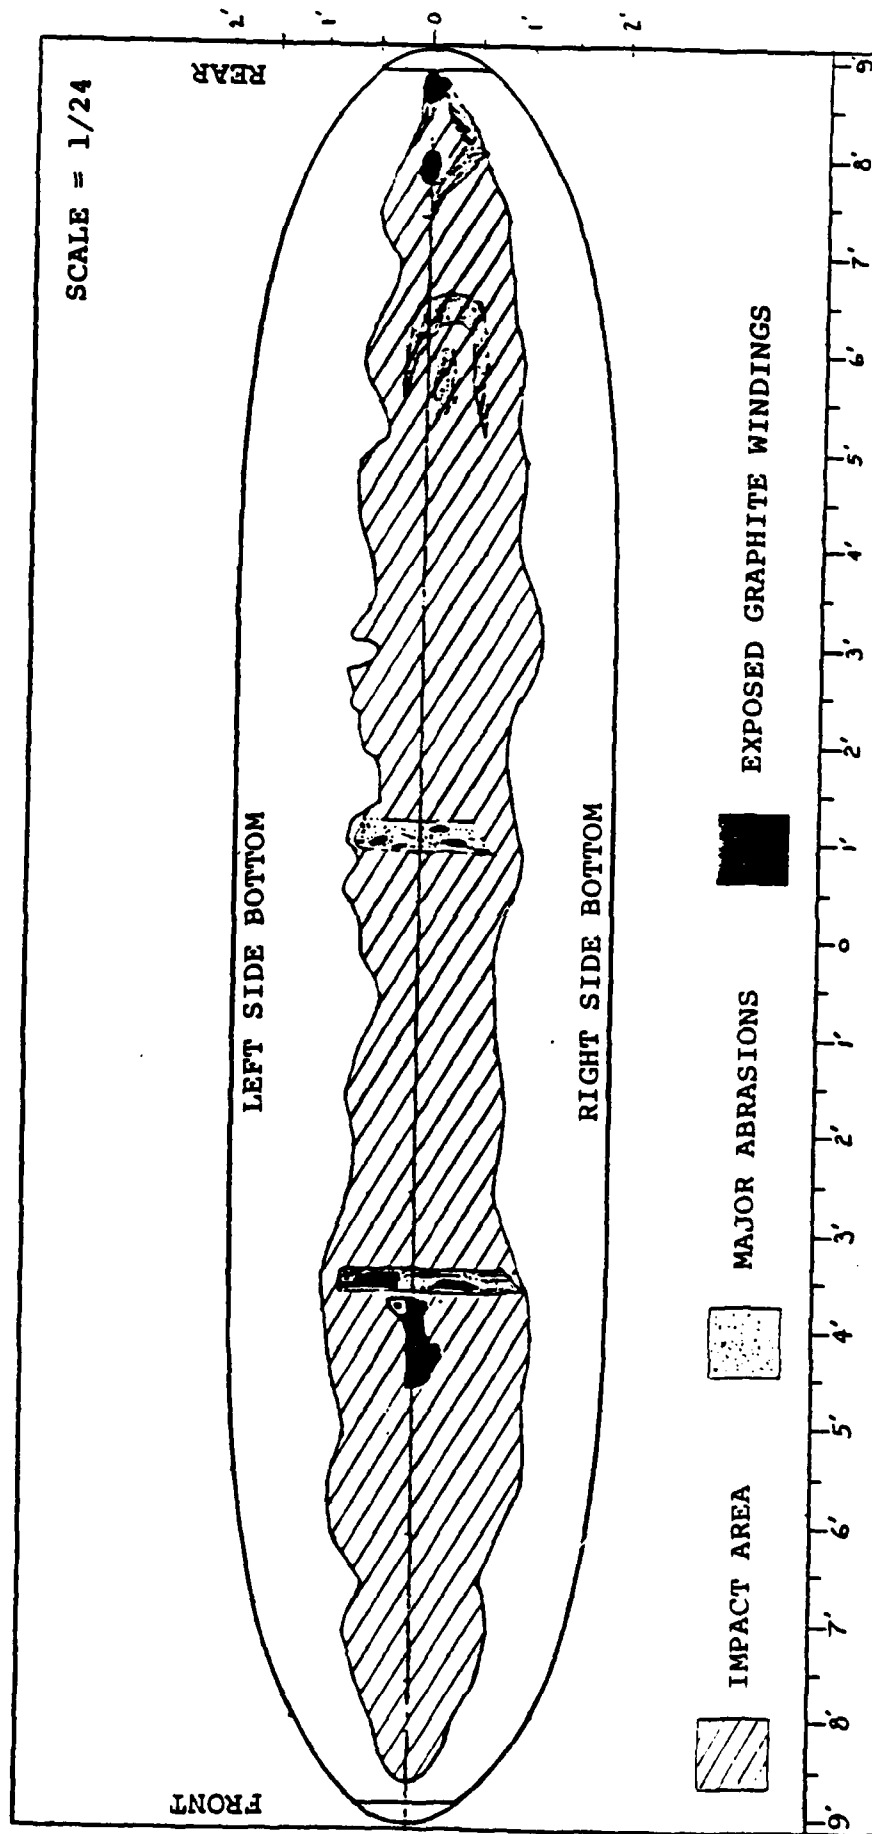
FUEL TANK SN0004 IMPACT IMPRINT SKETCH.
